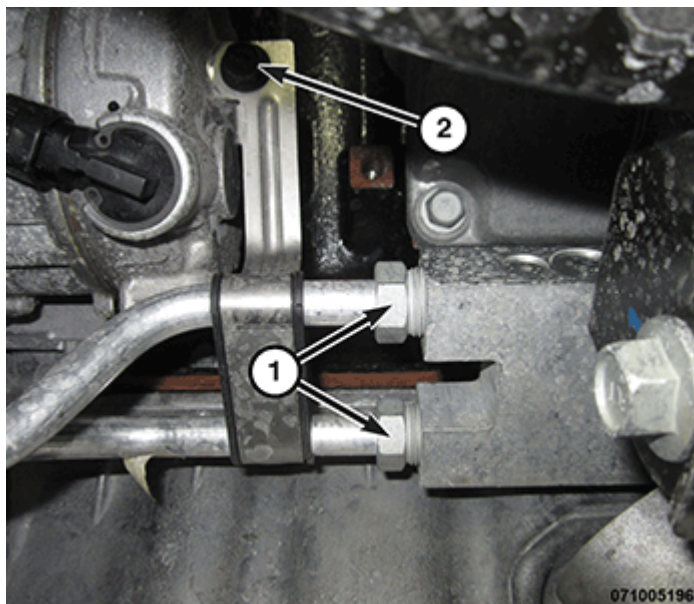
Rear Transmission Cooler Lines, Bracket & Bolt
